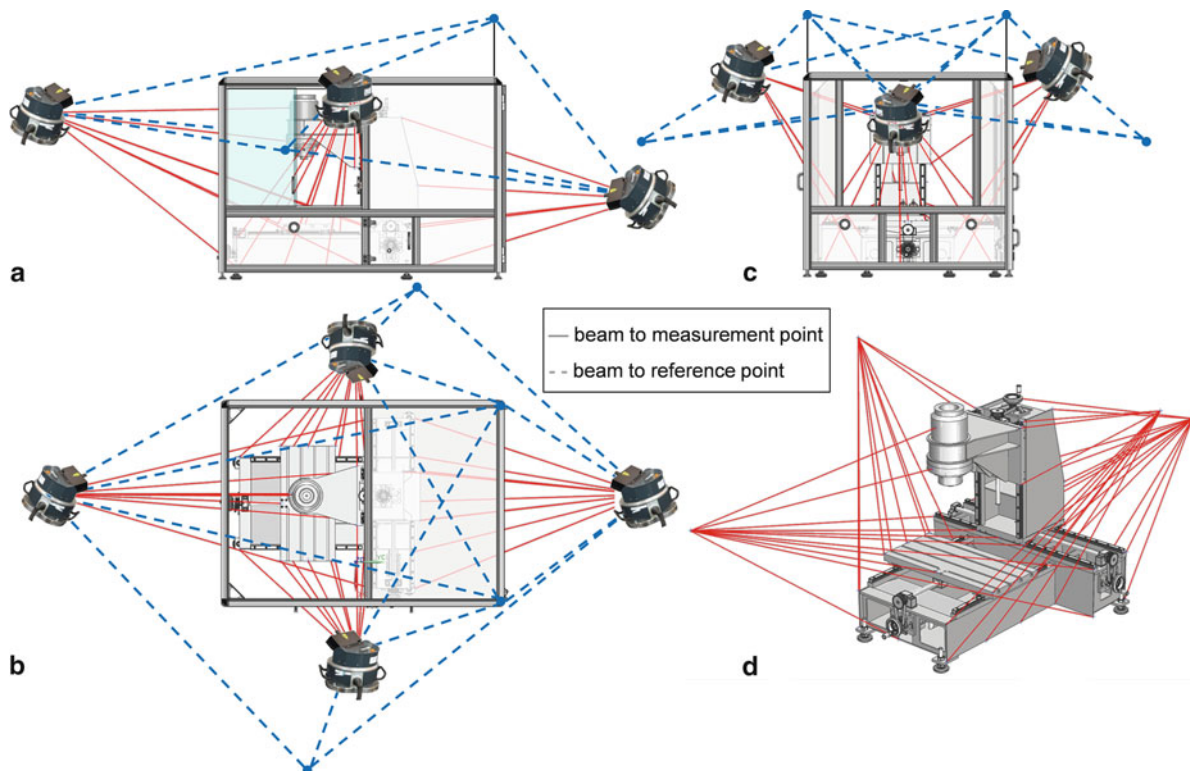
Strategy planning for the single beam method modal testing of the demonstrator machine tool
